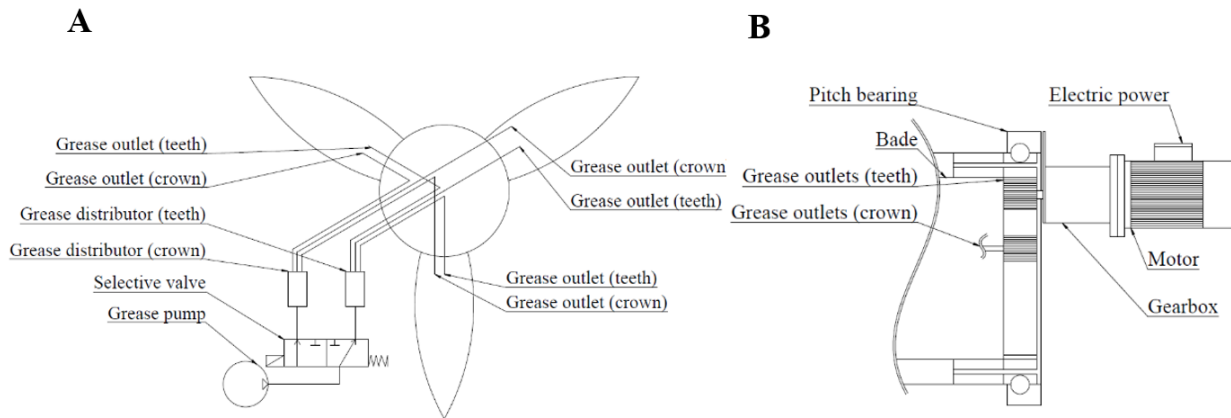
A: Schematic drawing of the micro-nozzles integrated in the wind turbine lubrication system. B: Integration per each blade.
